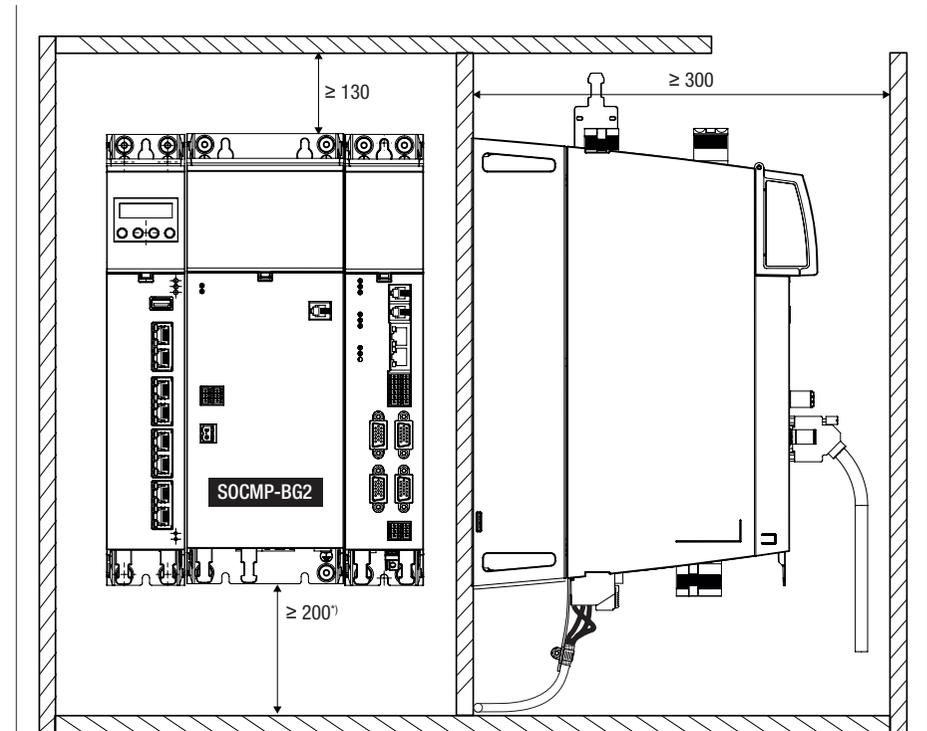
Mounting clearances, SystemOne CM-P supply unit
